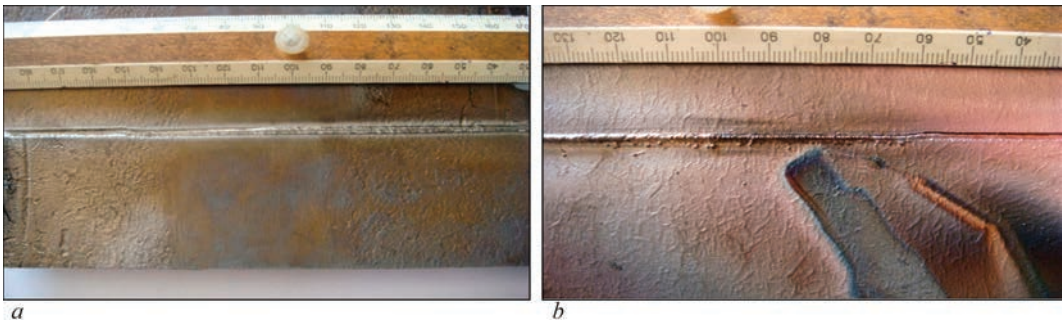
Welded joint of heat-resistant titanium alloy Ti–6.5Al–5.3Zr–2.2Sn–0.6Mo–0.5Nb–0.75Si made by EBW (mode 1), in as-welded condition: *a* — face; *b* — root side
